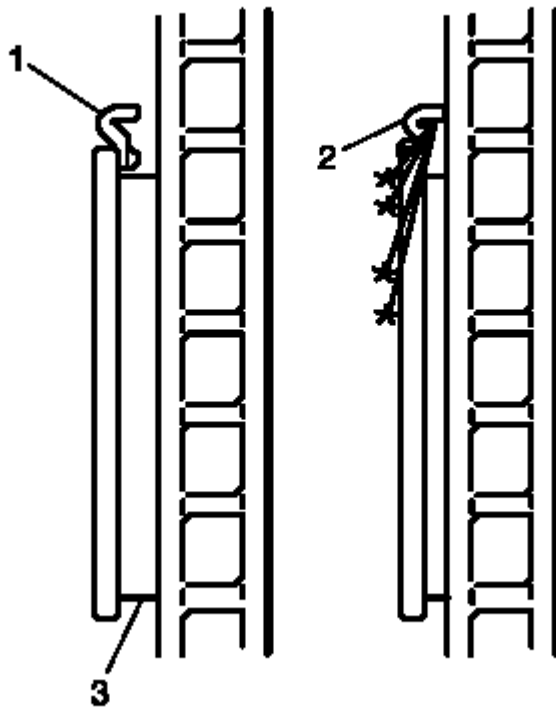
Disc Brake Pads And Audible Wear Sensors
